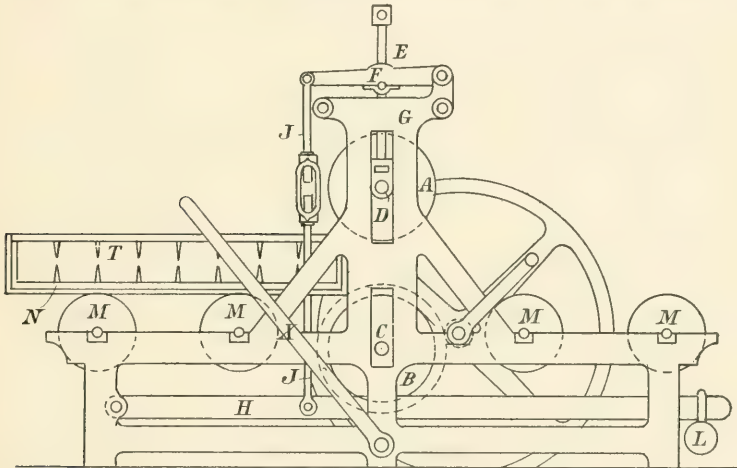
Stone's Peat-compressing Machine—Side Elevation.
